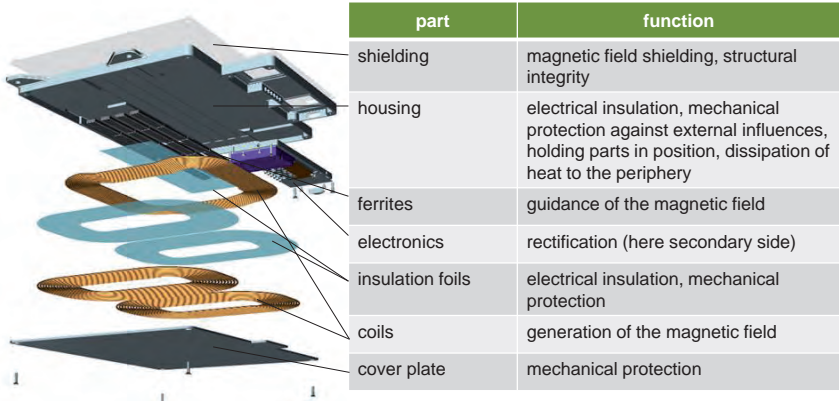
Exploded assembly drawing of a contactless charging pad based on a DDQ-system topology (secondary side based on [123]).
